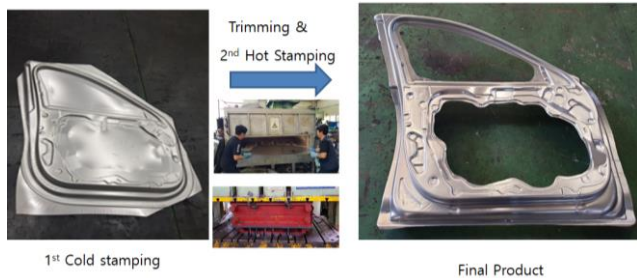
Tryout result of 1-Piece door inner part using the hybrid cold-hot stamping process
